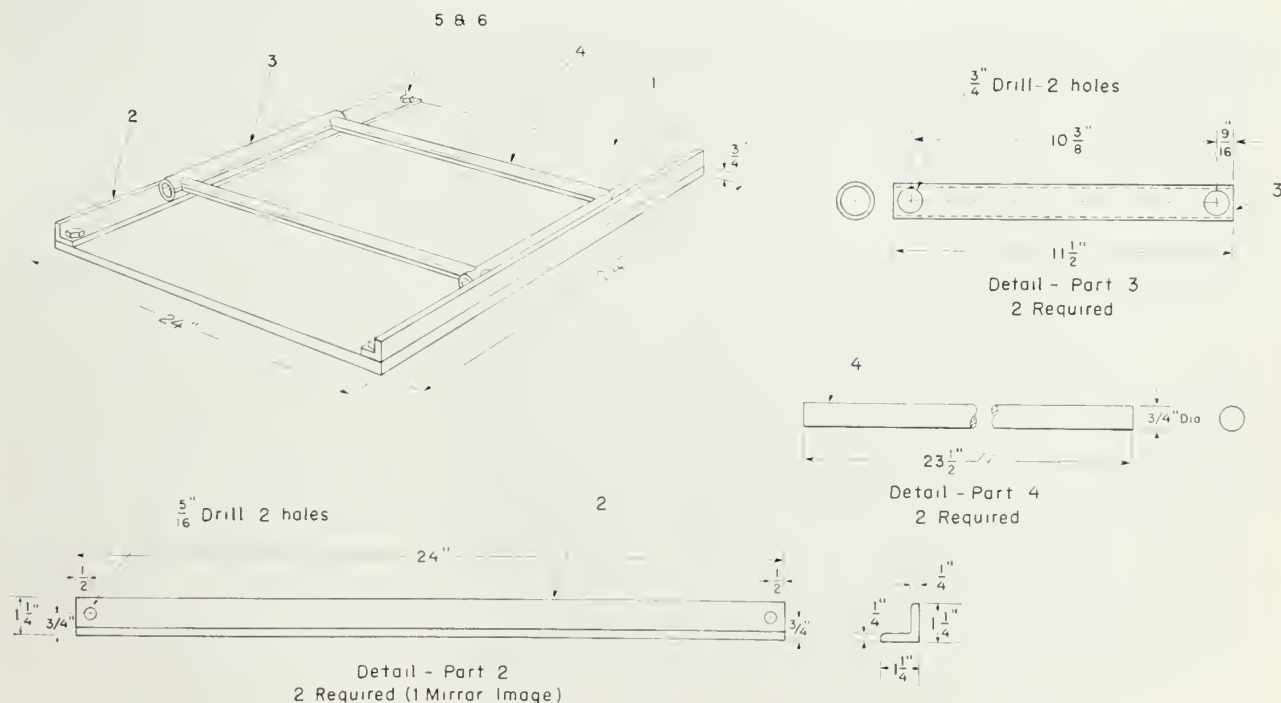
Construction plan for improved base for the Osborne firefinder.
